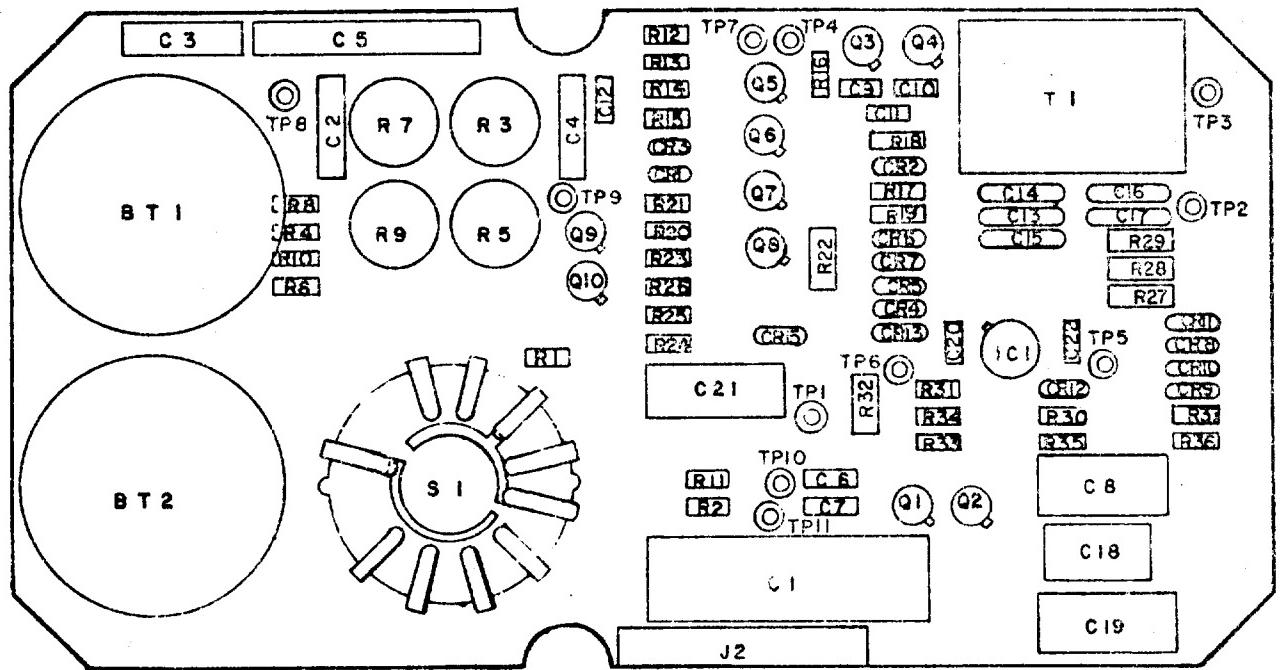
PARTS LOCATION, PRINTED WIRING BOARD ASSEMBLY 1A1
